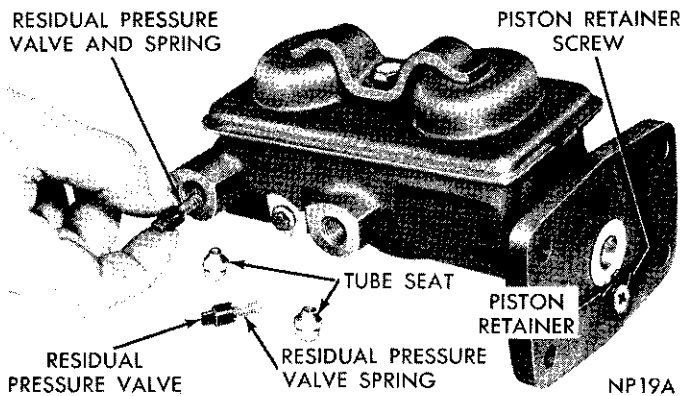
Removing or Installing Residual Pressure Valves and Springs
